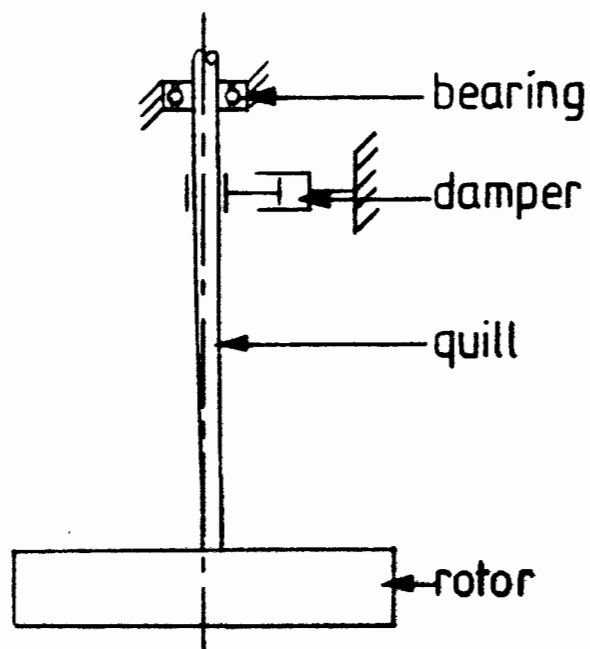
FLEXIBLE QUILL MOUNTING OF HIGH SPEED ROTOR
